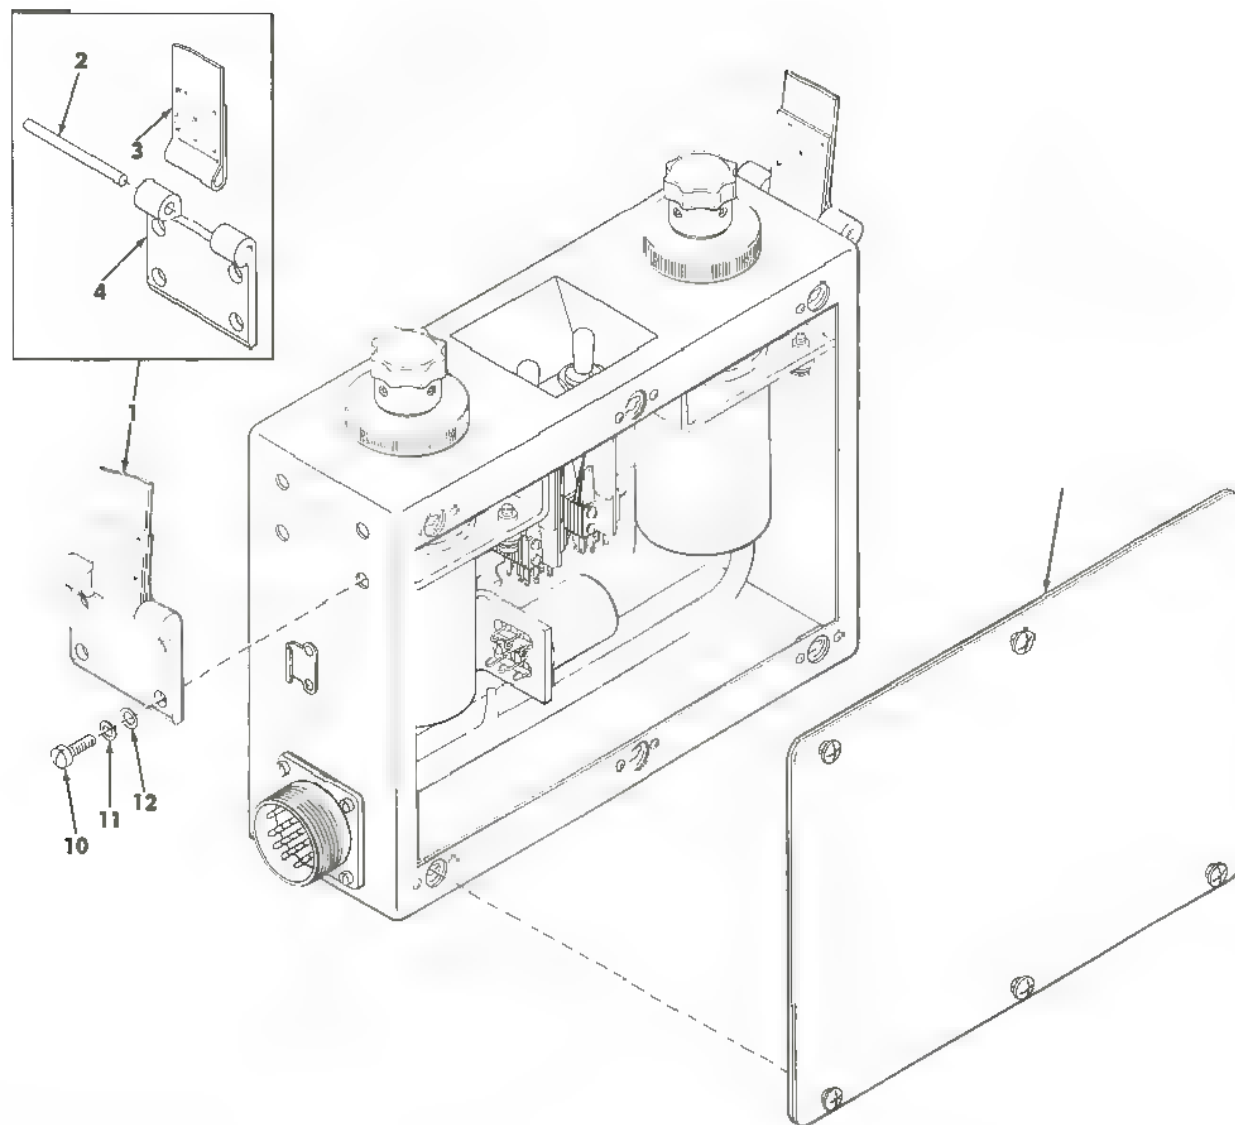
FRAME-FILTER /8171042/-EXPLODED VIEW
